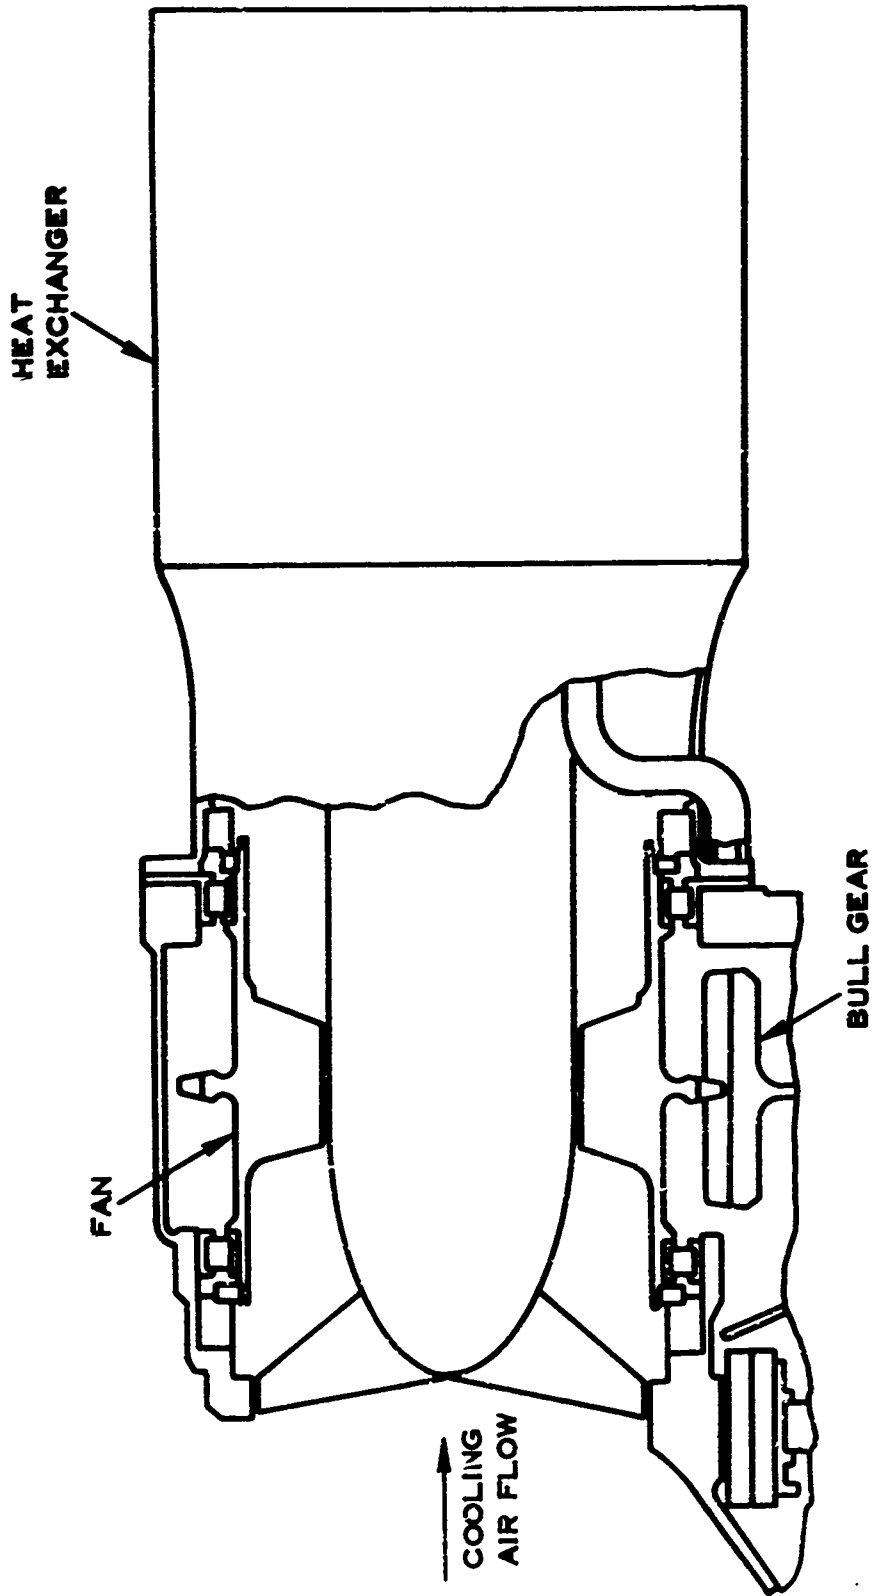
INTEGRAL OIL COOLER AND FAN
